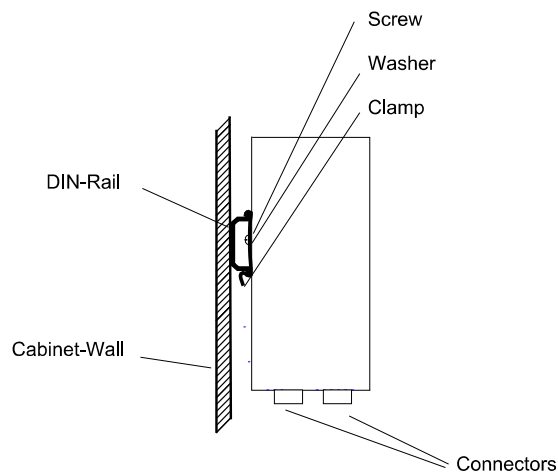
Recommended way of mounting the IPC/COMPACTA1-1KE onto the DIN-Rail
